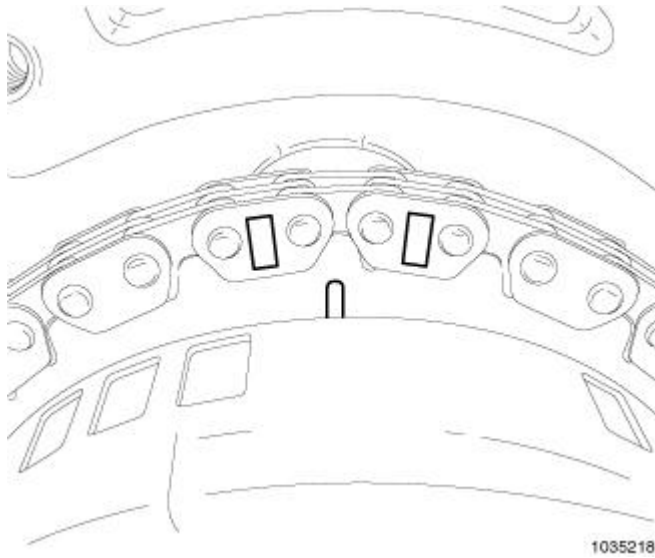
Aligning Timing Chain & Camshaft Phaser Marks
